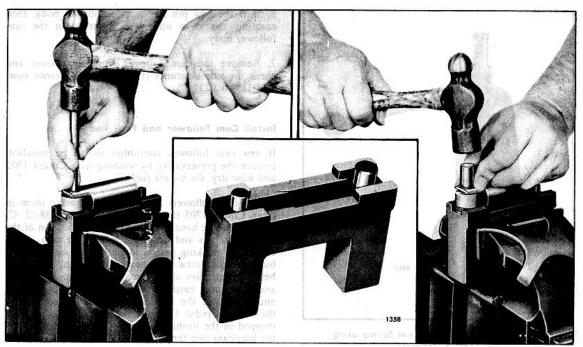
Removing or Installing Cam Follower Roller using Tool J 5840-01
